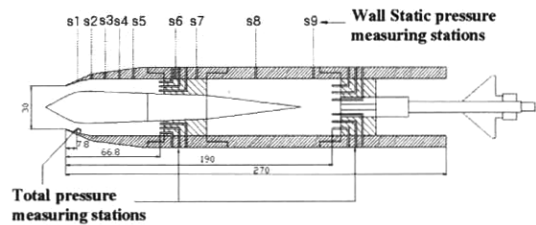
Dimension and pressure measurement stations (unit : mm)
